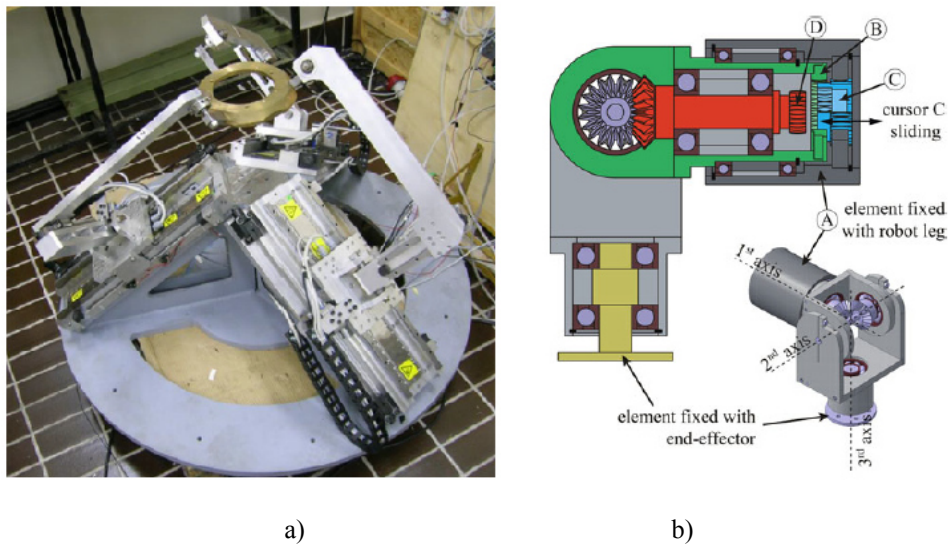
3-CPU mechanism [36]: a) general view; b) reconfigurable U-joint.
